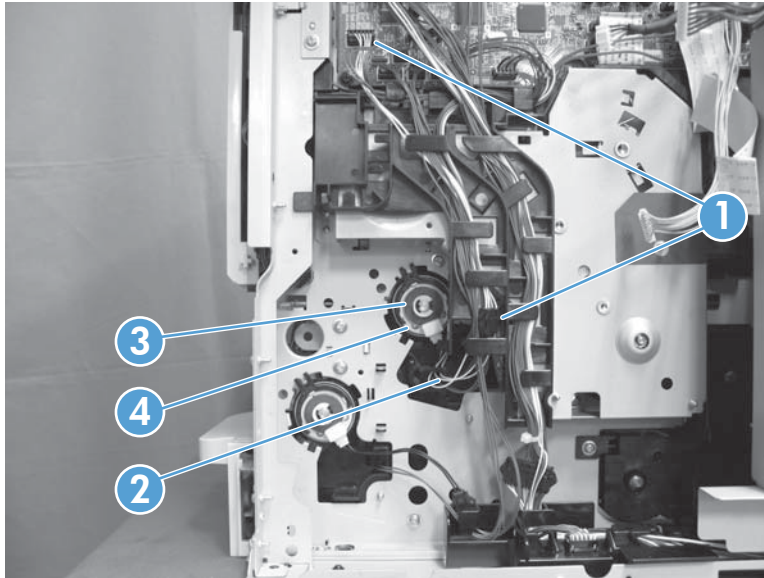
Remove the upper cassette pickup assembly (1 of 2)
